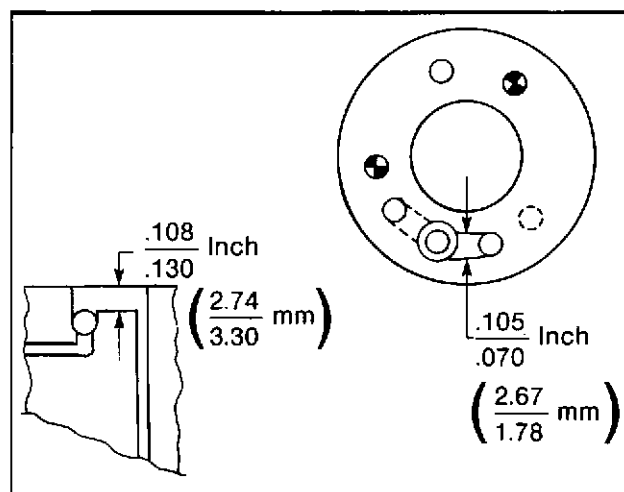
Dimensions of the fuel groove in the injector barrel
